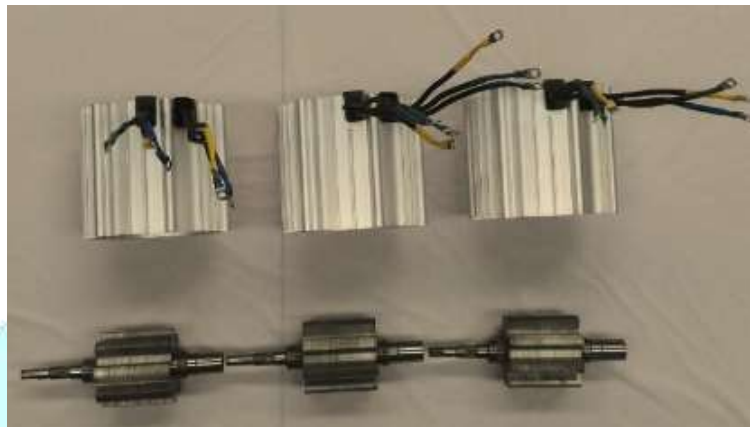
Fabricated SR motors using M400-50A, DI MAX-M19 and DI MAX-M15.
